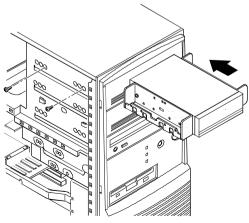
28 Inserting a Device into Upper Drive Bay
